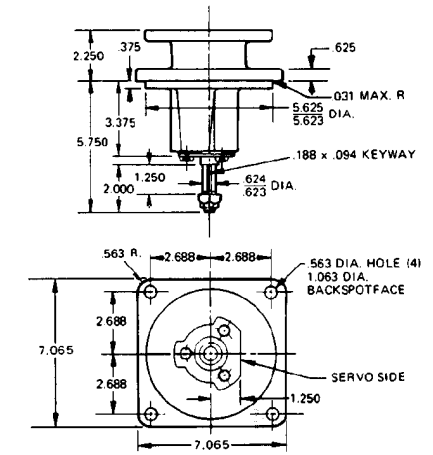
Outline Drawing of EGB-10C Governor/Actuator
